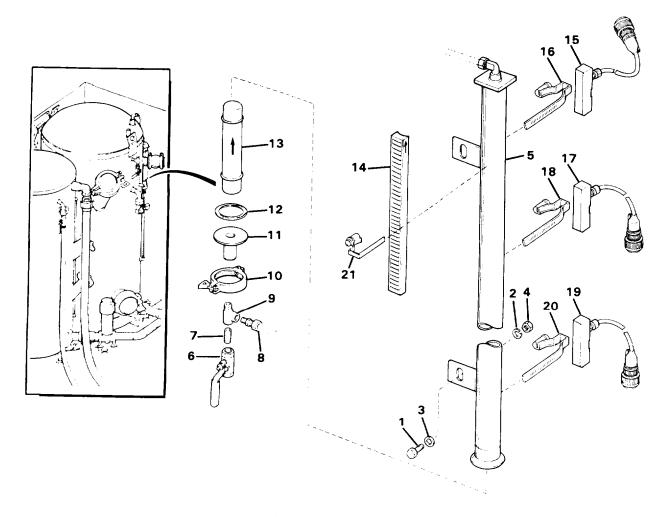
Media Filter Air Blanket Level Indicator Assembly
